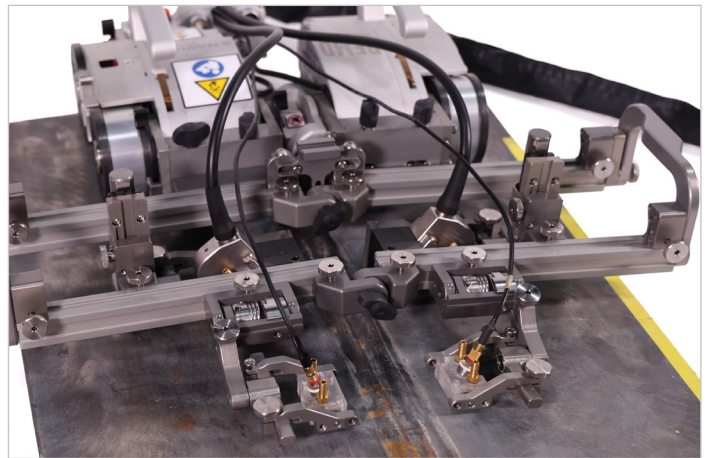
and 10: Automated crawler for corrosion and weld inspection. Handles removable.
